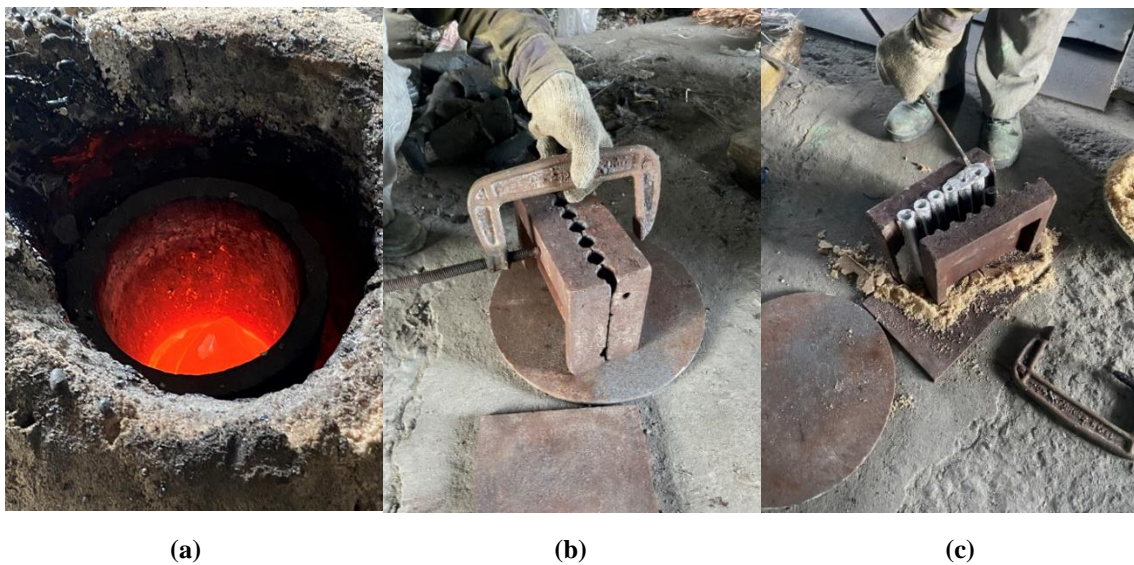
(a) Molten form of all metals rotating in the vessel (b) Clamping the moulds using pins (c) Solidification of metal after pouring in the mould
